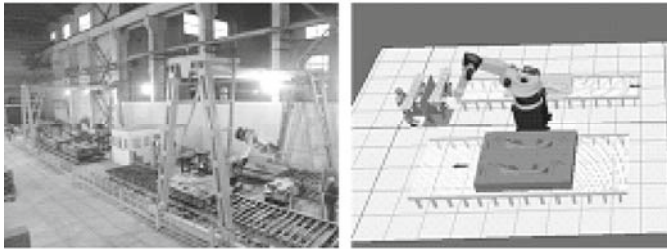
A sand core handling/assembly system. (a) Photo of an installed system; (b) Materials handling workcell
